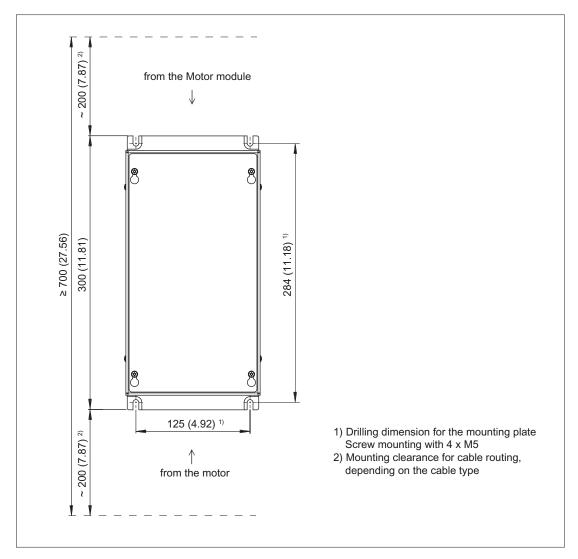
Mounting dimension for a Voltage Protection Module VPM120
